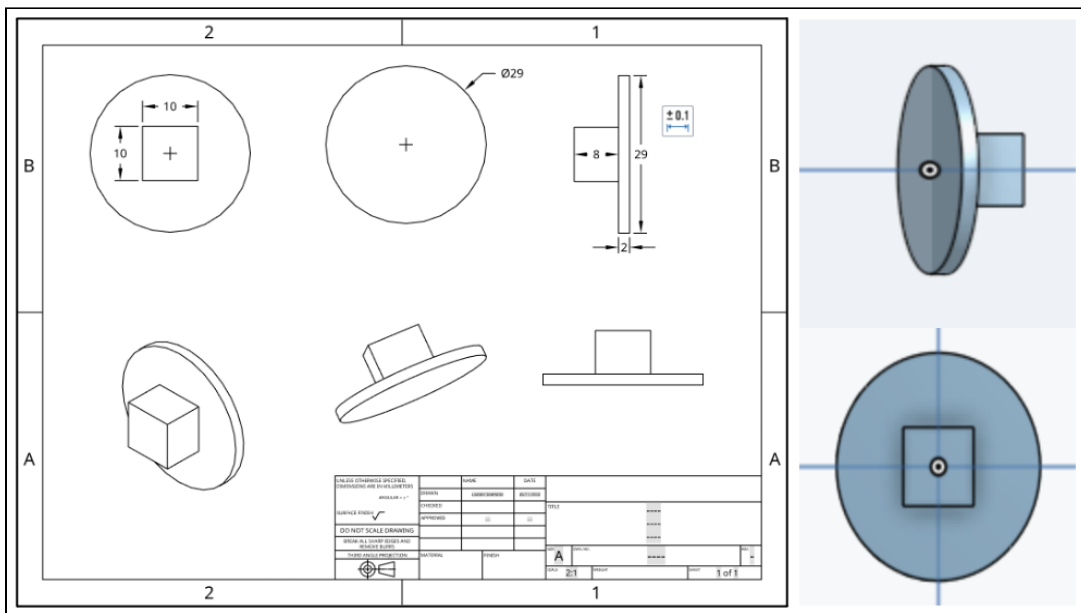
Figure B: Finalized CAD designs for the 3D printed buttons of EchoScope.
